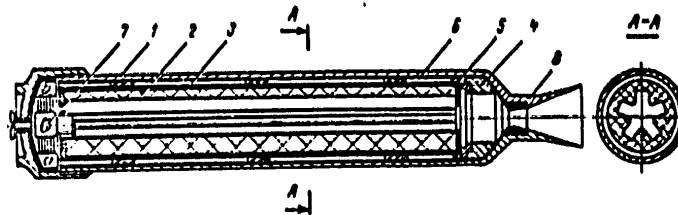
Solid-Propellant Rocket Motor With Coated Insert Charge
